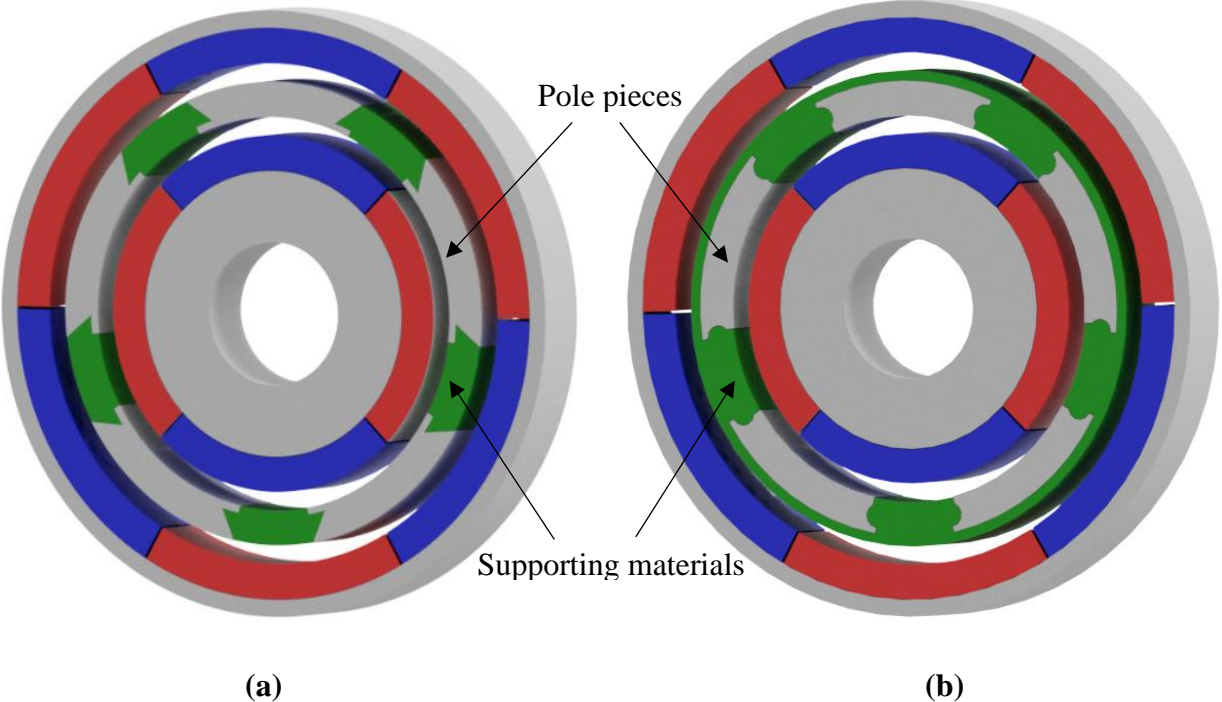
Modulation ring design with (a) mechanical interlocking features (b) encapsulated pole pieces
